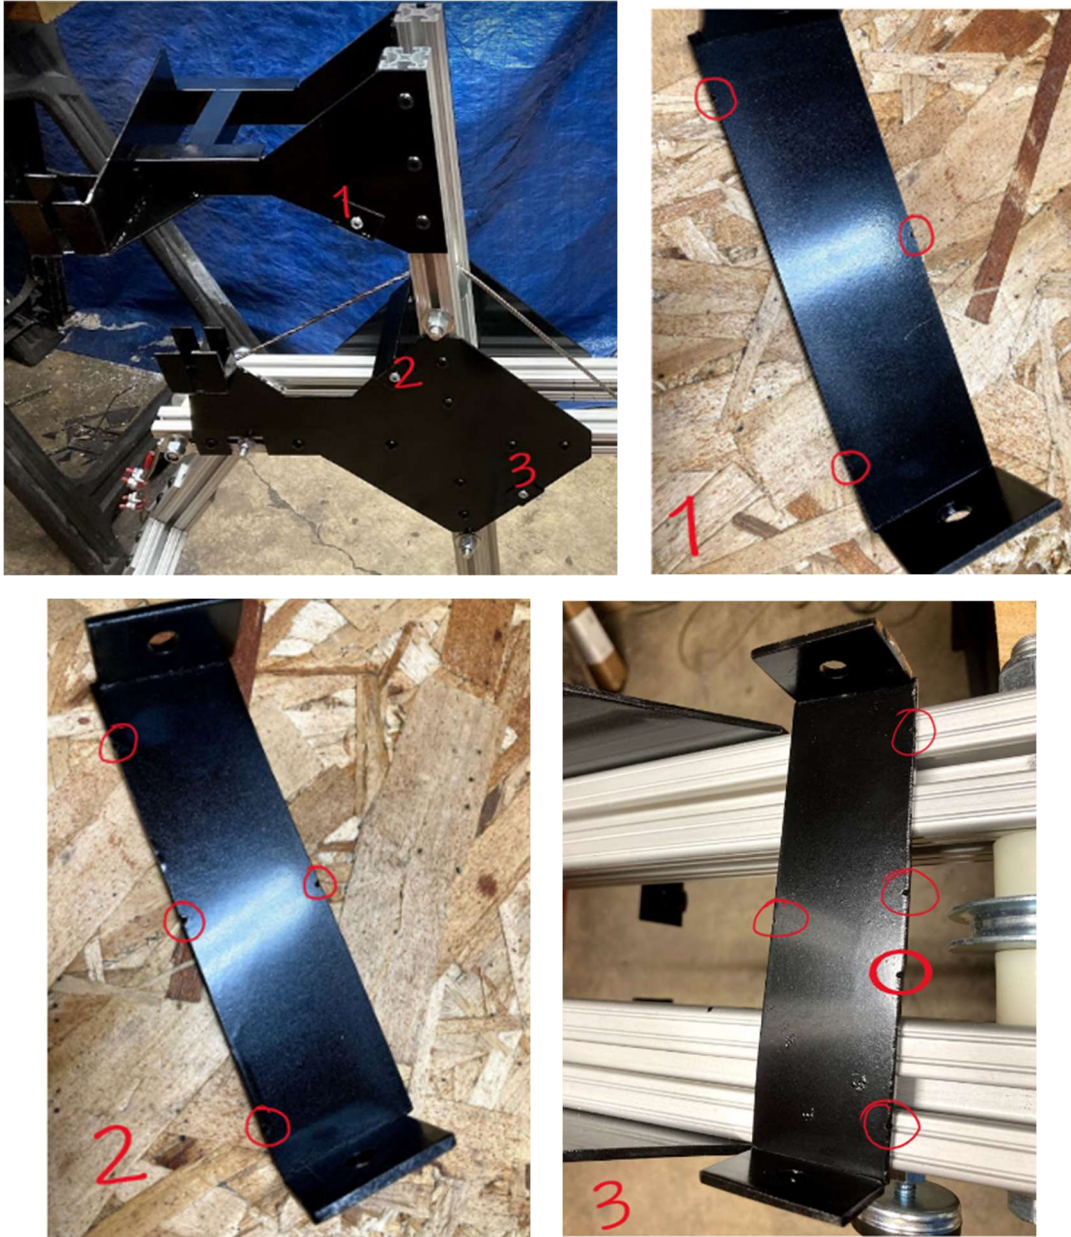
FEMUR JIG BRACKET POSITIONING (TOP, LEFT). THE SIDE OF THE BRACKET WITH A SINGLE NOTCH INDICATES THE SIDE WHICH IS CLOSEST TO THE WINCH END OF THE TEST JIG. THE OTHER SIDE OF THE BRACKET HAS A SPECIFIC NUMBER OF NOTCHES, WHICH INDICATE ITS POSITION ON THE FEMUR JIG ASSEMBLY.
